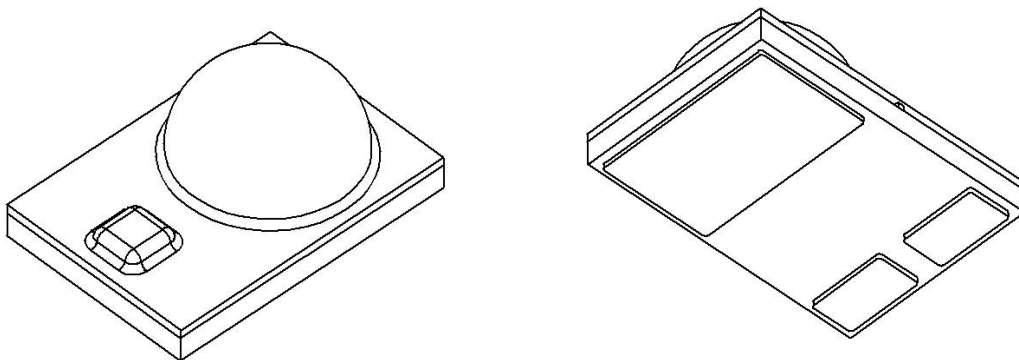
Isometric drawing for 2mm<sup>2</sup> package.
